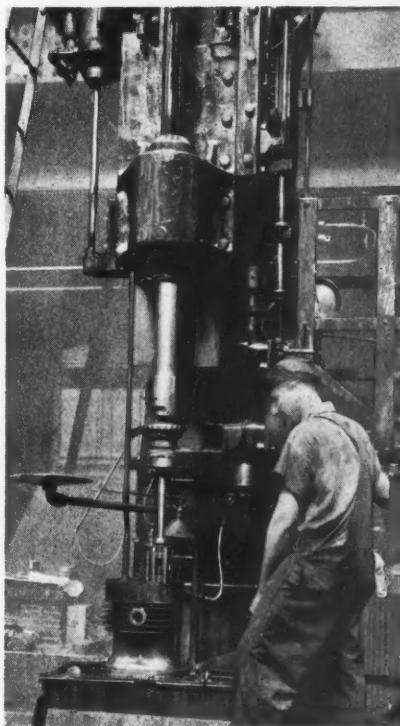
With this hydraulic honing machine and a Micromatic hone the cylinder bores are honed to within plus or minus 0.00025 inches of drawing size.
